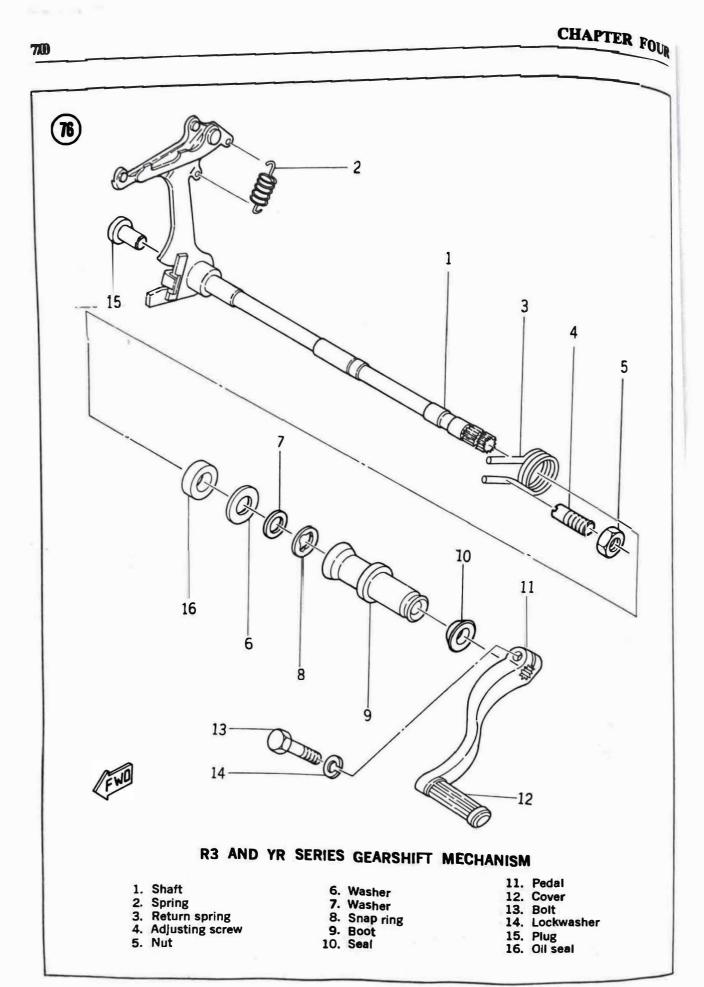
and 76 are exploded views of the internal and external parts. This shifter uses a drum cam to move the shifter forks. The shifter cannot be completely disassembled until the crankcase is split and the transmission removed. Refer to this chapter under *Crankcase* and *Transmission*.
